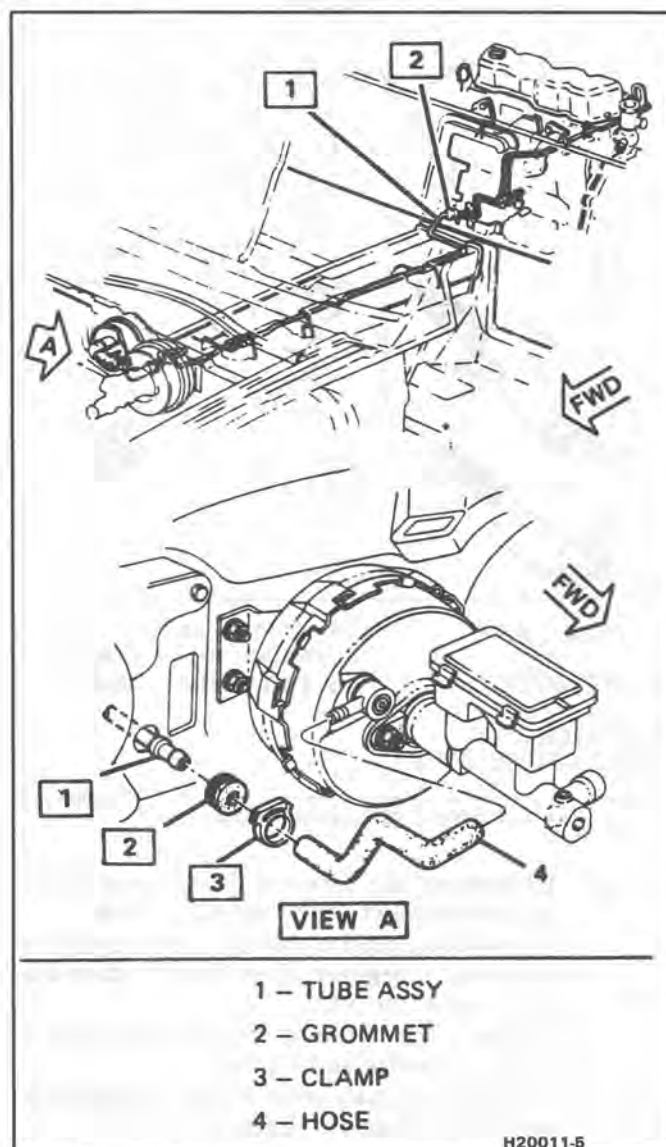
Power Brake Hoses &amp; Tube Assembly
